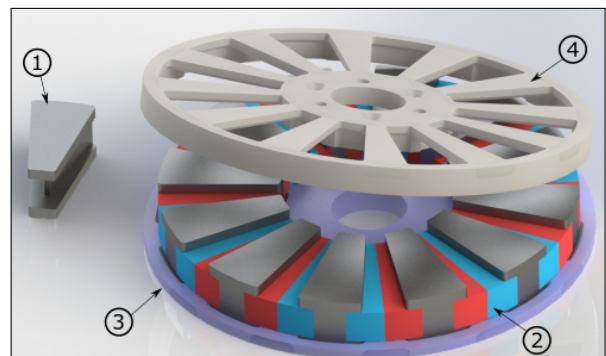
Assembling of the crown of PMs and iron parts with the 3d-printed tool, and clamping of the Onyx part.
